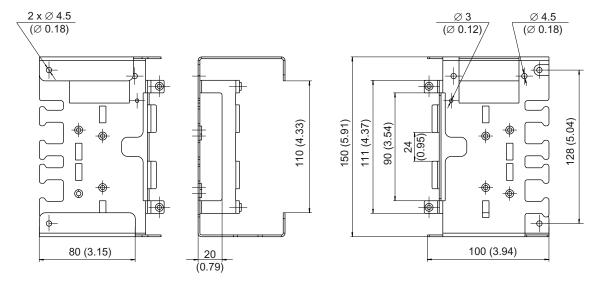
Dimension drawing, screening kit, frame size FSB, all data in mm (inches)
